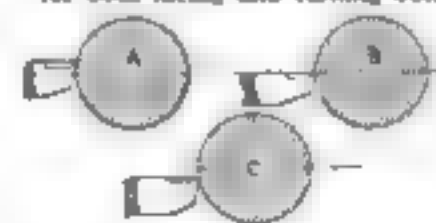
A tool set as at A obviously would dig into the work; the right position is below center.
